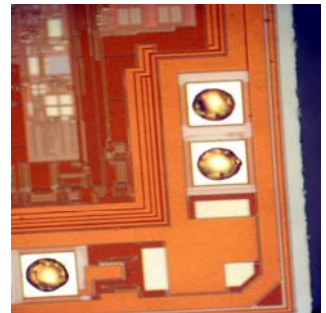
die removed, cleaned with gold wires removed ready for installing in new package
